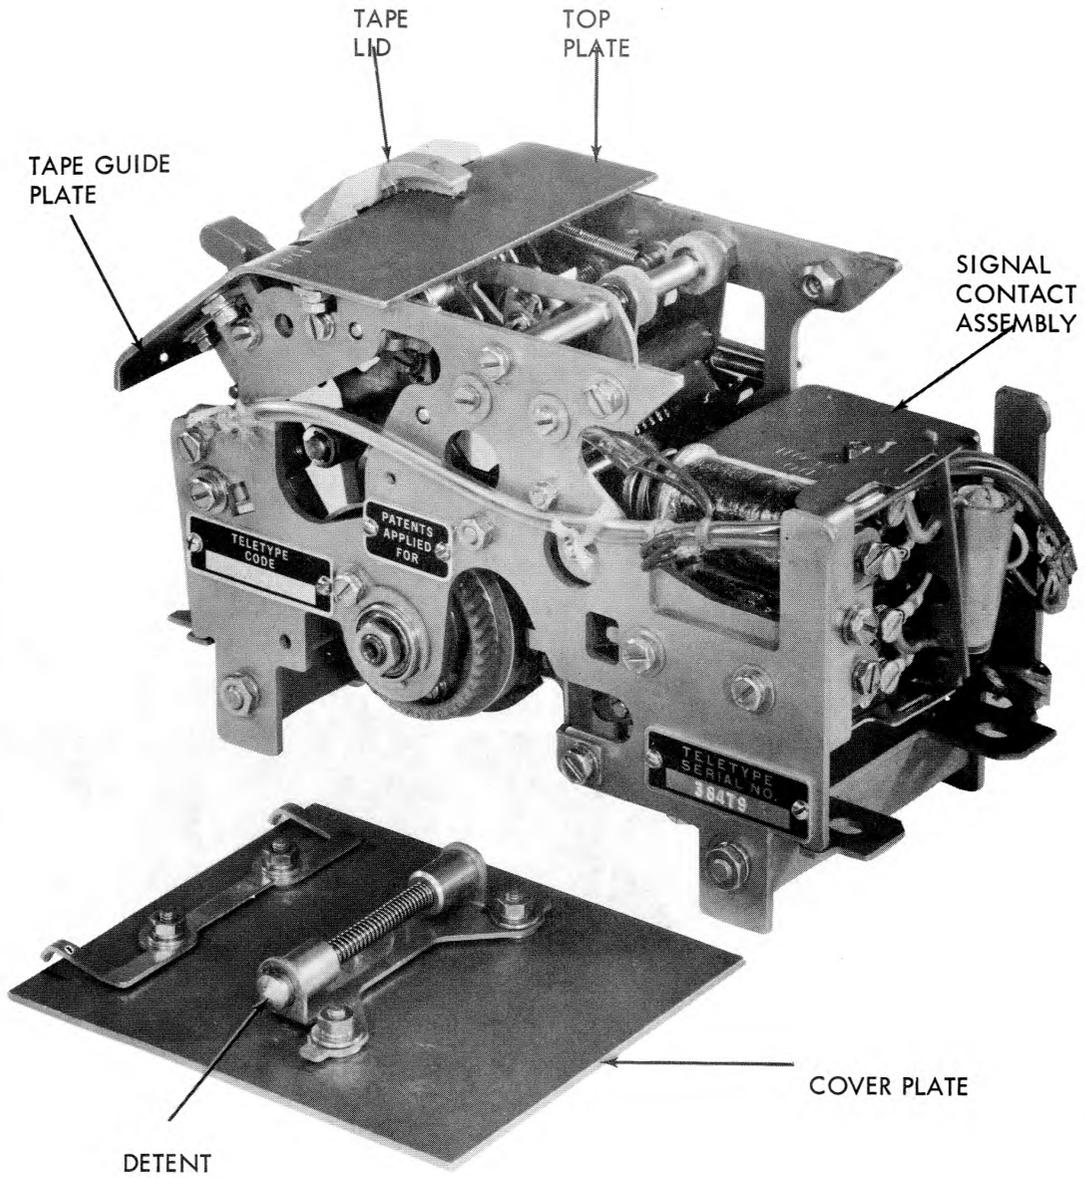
35 Transmitter Distributor Cover Plate Removed
